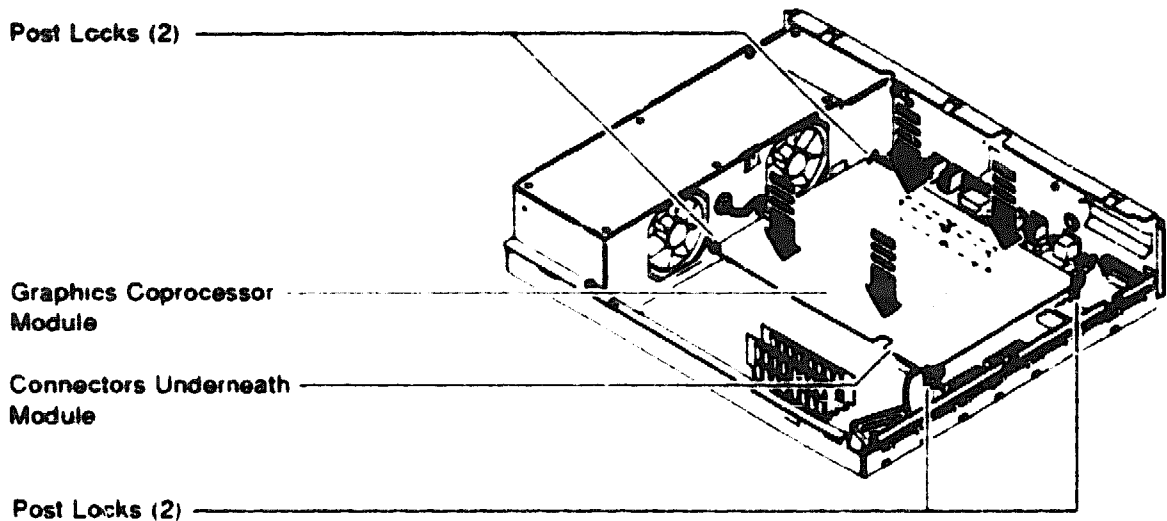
Mounting Post Locks on the Model 76 System Board
